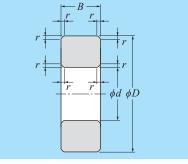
Radial bearings (excluding tapered roller bearings)
